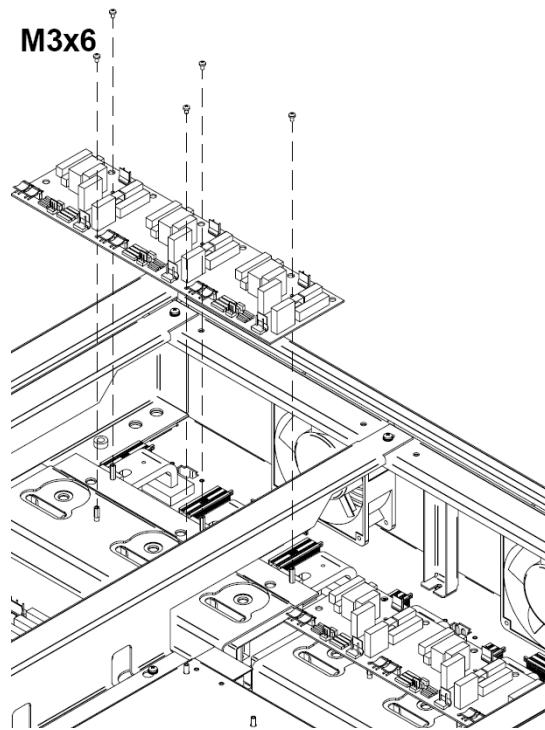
(c) Disassembly of the Snubber, Trigger and Soft charge protection
